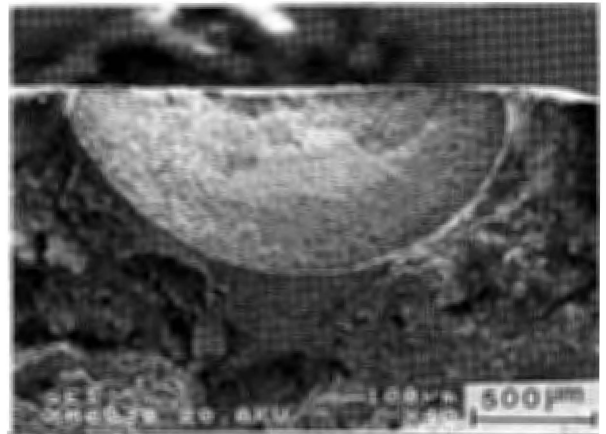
Fractograph showing crack profile of wire rod
